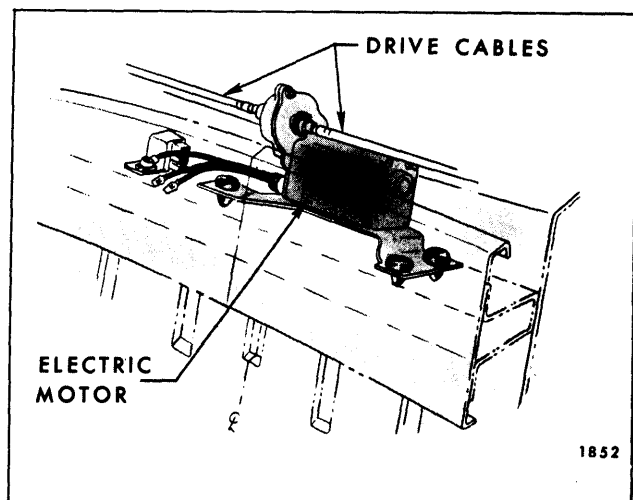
Folding Top Electric Power Unit "Z" Styles
